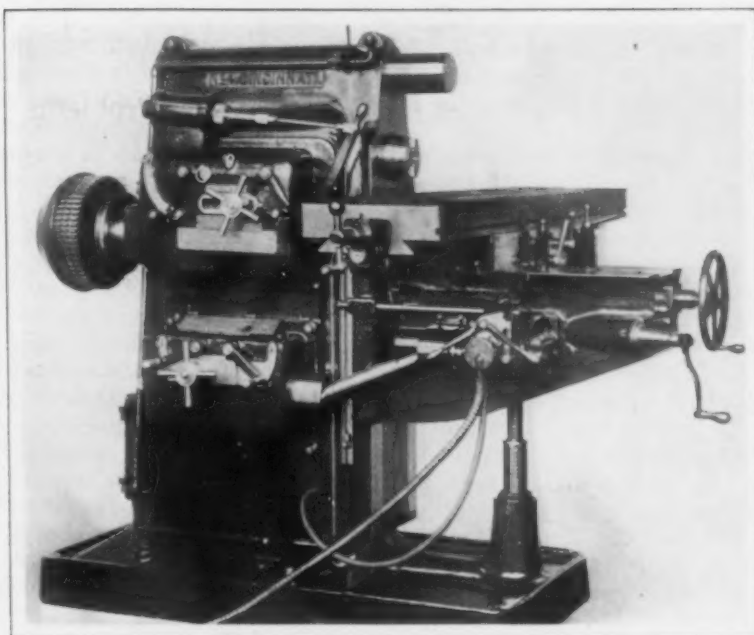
Attachment to Prevent Marking of Work by Quickly Stopping Rotation of Milling Cutter
